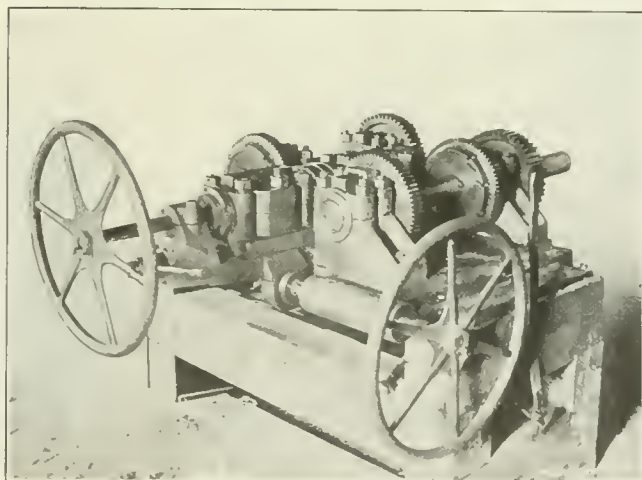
Machine for Forming the Teeth of Gears by a Rolling Process
